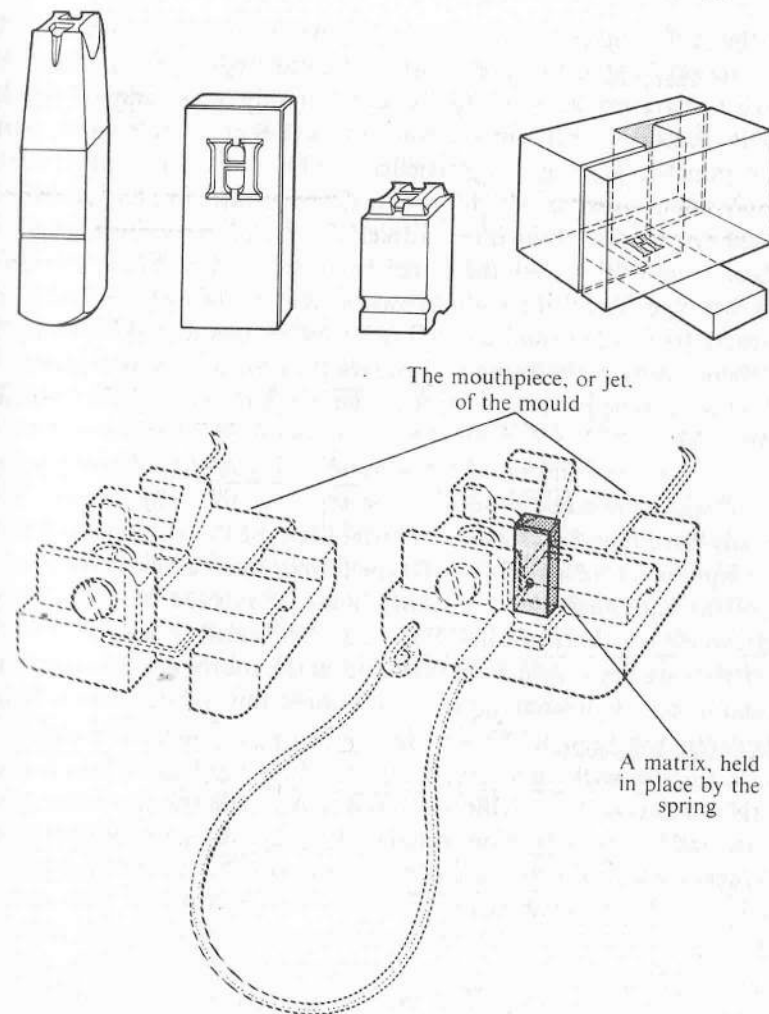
(a). Punch, matrix, and type; and the principle of the hand mould shown schematically.
